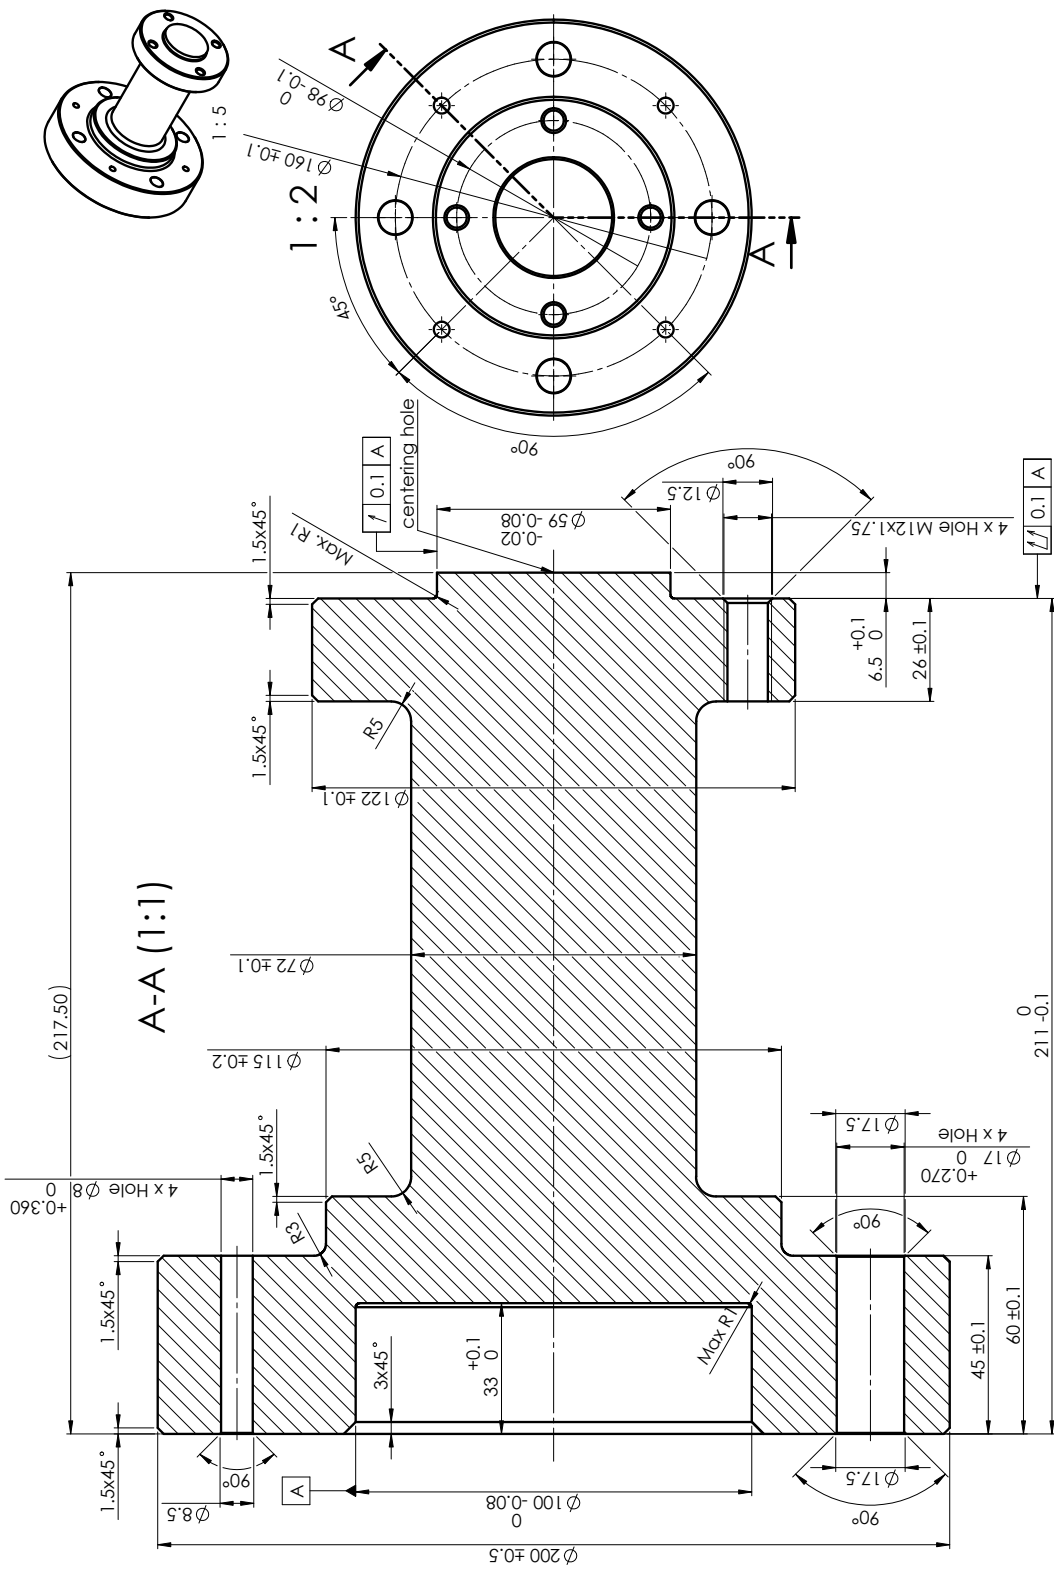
Drawing showing all dimensions used to manufacture the adaptor for the Fiat Punto disc.
